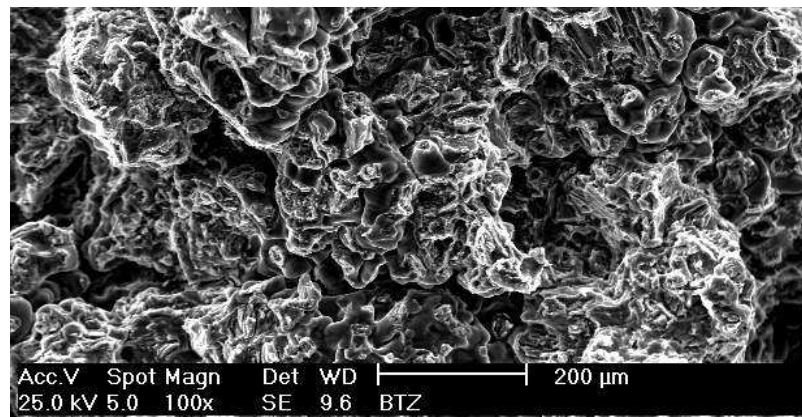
The fracture surface of impact test sample of alloy A
